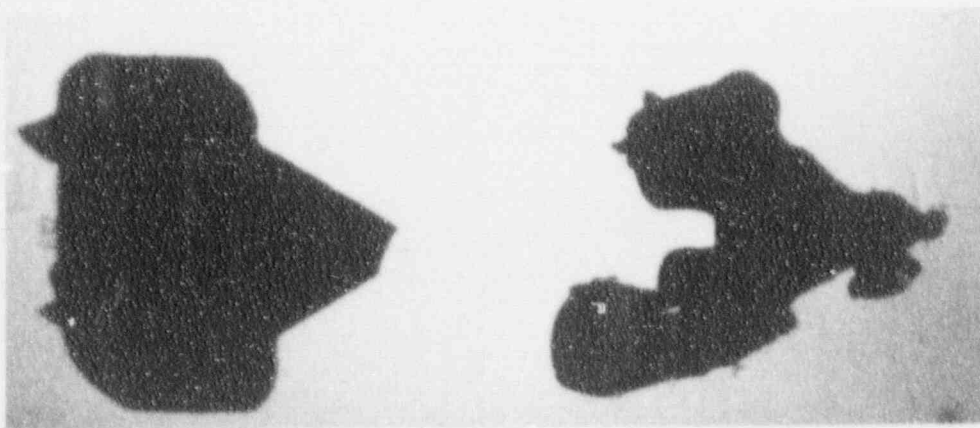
Section photograph - damaged thread seal (right side) (seal damaged due to failure to utilize flat washer with nut)
